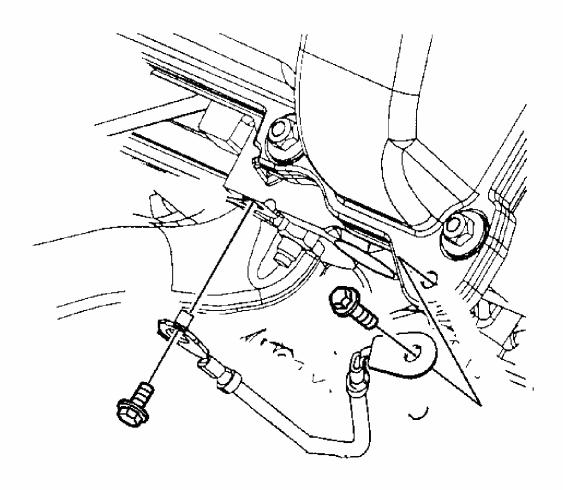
Identifying Ignition Coil Ground Strap & Bolt Courtesy of GENERAL MOTORS CORP.
